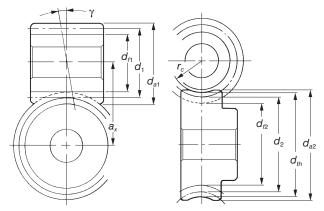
Dimensions of Cylindrical Worm Gears
